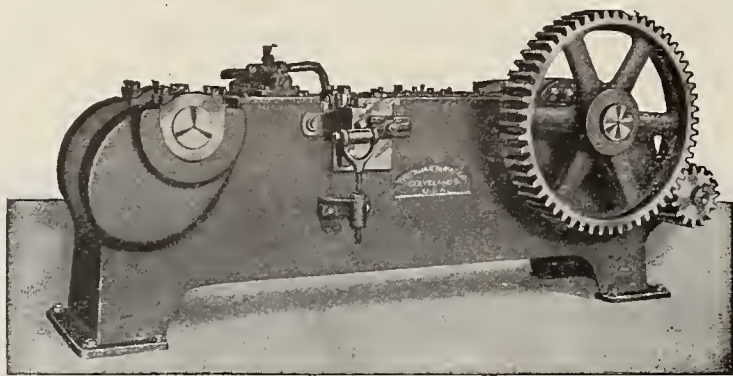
1½-IN. AJAX HOT PRESSED NUT MACHINE C. P. R. SHOPS.
